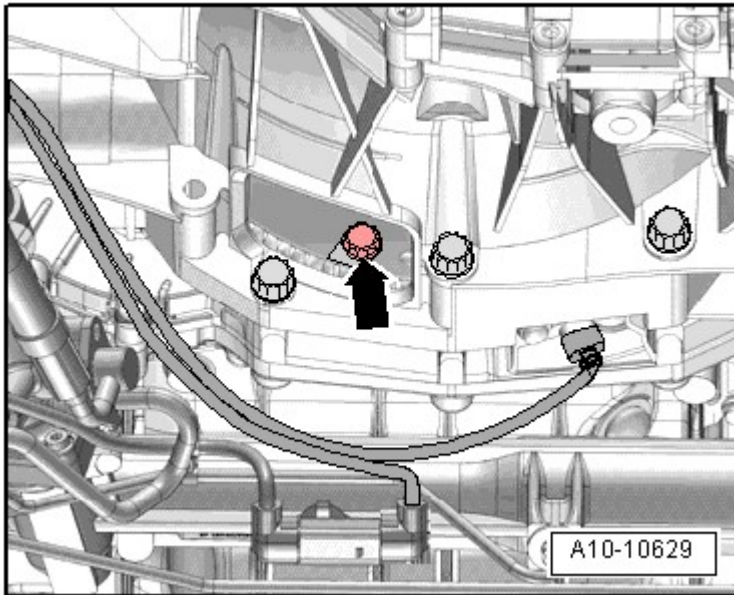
Identifying Clutch Module First Bolt Installation Location
